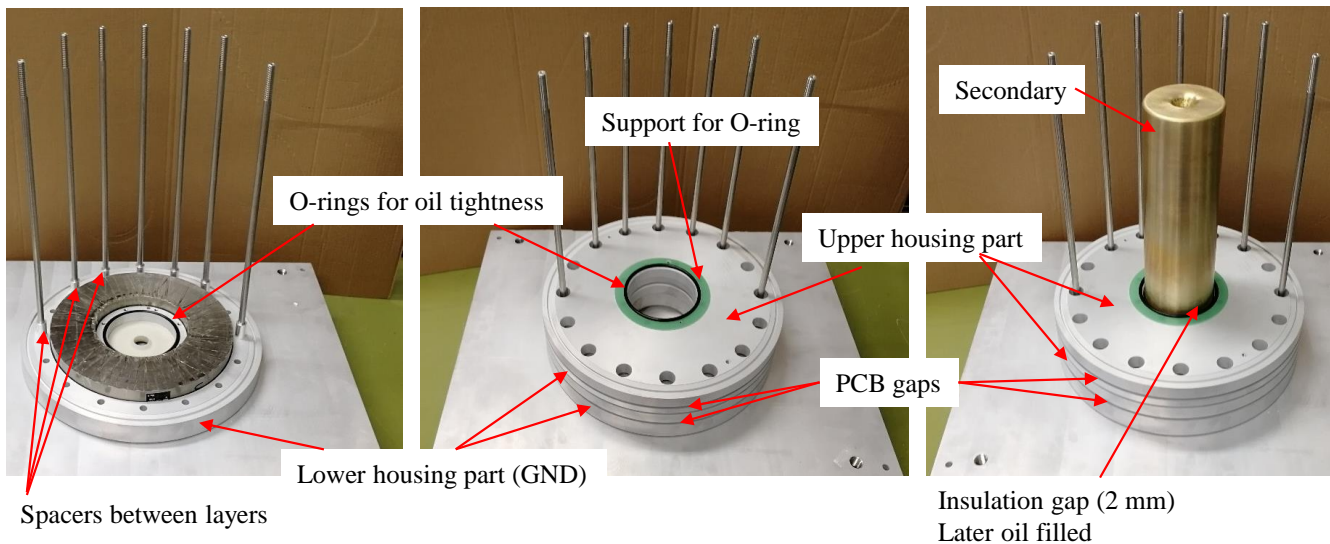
Assembly of the stack consisting of the pre-mounted layers and the stalk
